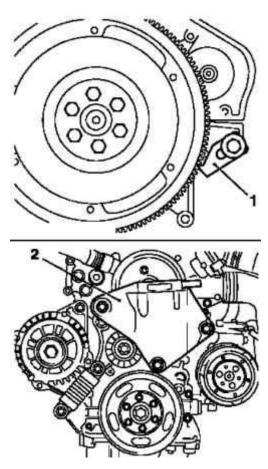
Withdrawal of support damping unit: 1 - a special device, 2 - bearing damping unit
